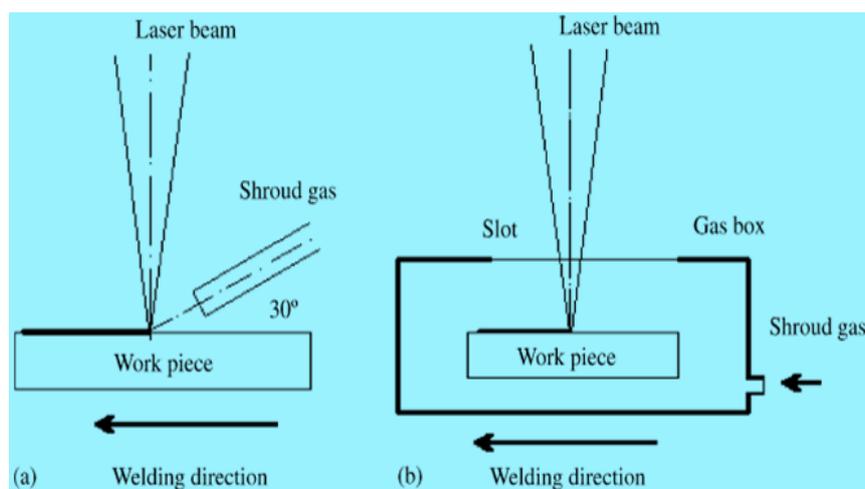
Welding configuration (a) with a shroud gas feed tube and (b) in a gas box.
